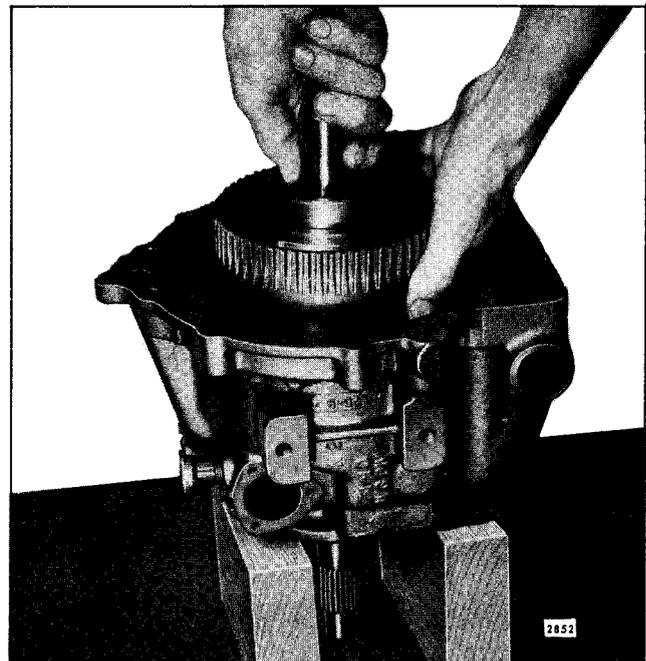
Removing Drive Gear Input Shaft, Forward Clutch and Ring Gear Assembly from Reverse Gear Housing
